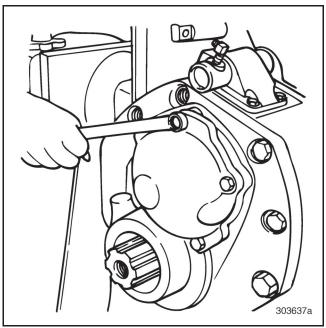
Removing Front-Drive Shaft Bearing Cover Capscrews
